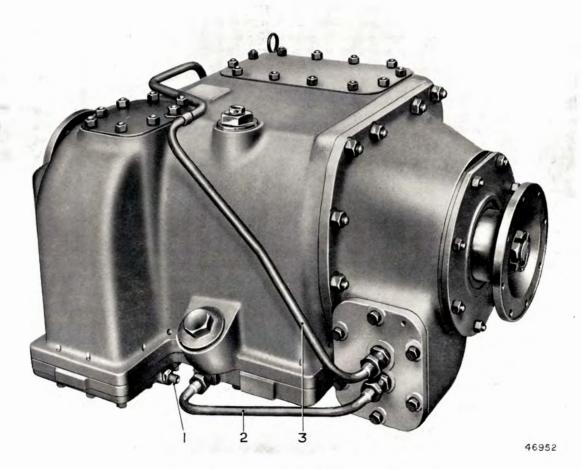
RIGHT-HAND VIEW OF THE GEARBOX
